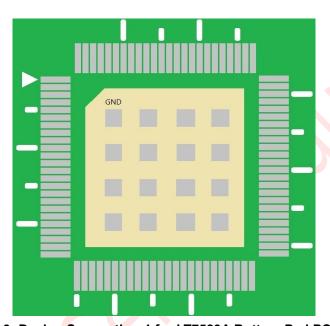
Design Suggestion-1 for LT7589A Bottom Pad PCB Layout
